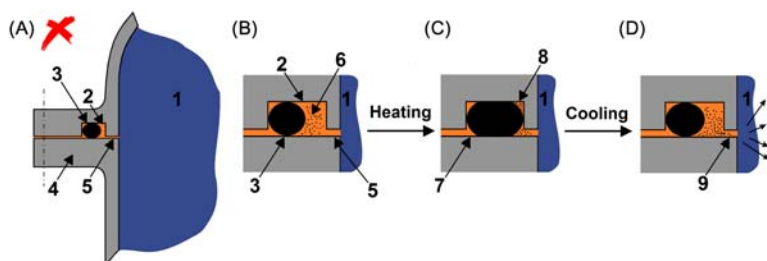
(A) A conventionally designed right-angled groove (2) contains an O-ring (3) that is compressed between the sealing faces of two stainless steel surfaces (4) to separate the product area (1) from the outside. (B) Such a rectangular groove—O-ring design invariably create gaps and crevices (5) that are impossible to clean in-place and/or to sterilize in-place. The groove provides sufficient space for microorganisms (6) to enter via the crevice. (C) During heating, due to the difference in thermal expansion between metals and elastomers, the O-ring will expand (7) to cover an increasingly larger surface of steel, protecting microorganisms (8) trapped between the O-ring and the steel surface against contact with hot water, chemical solution or steam. (D) After cooling down and shrinkage of the seal, the surviving microorganisms may be released (9) and will multiply and contaminate the product (Lelieveld et al., 2003; Hauser et al., 2007).
